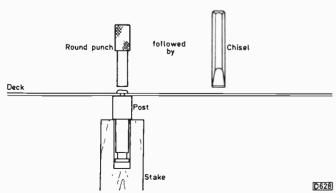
Use of a stake, punch and chisel for re-riveting. Four stake sizes cover all posts in the machine.
